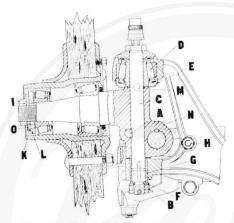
Front Left Spindle and Hub, Showing Bearings.
